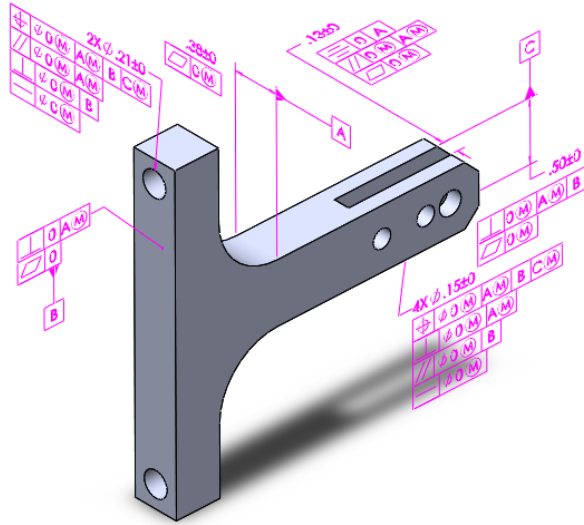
11: Right Support with Form Tolerance Frames Added
